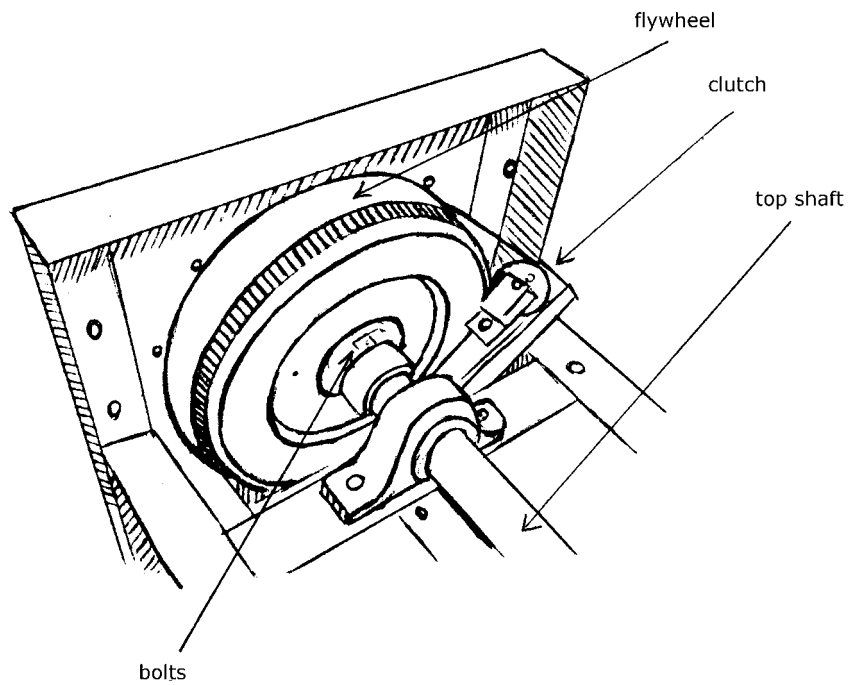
HTD unit flywheel clutch. If you consider a used clutch, check clutch pads and find out whether new replacement pads are available.
